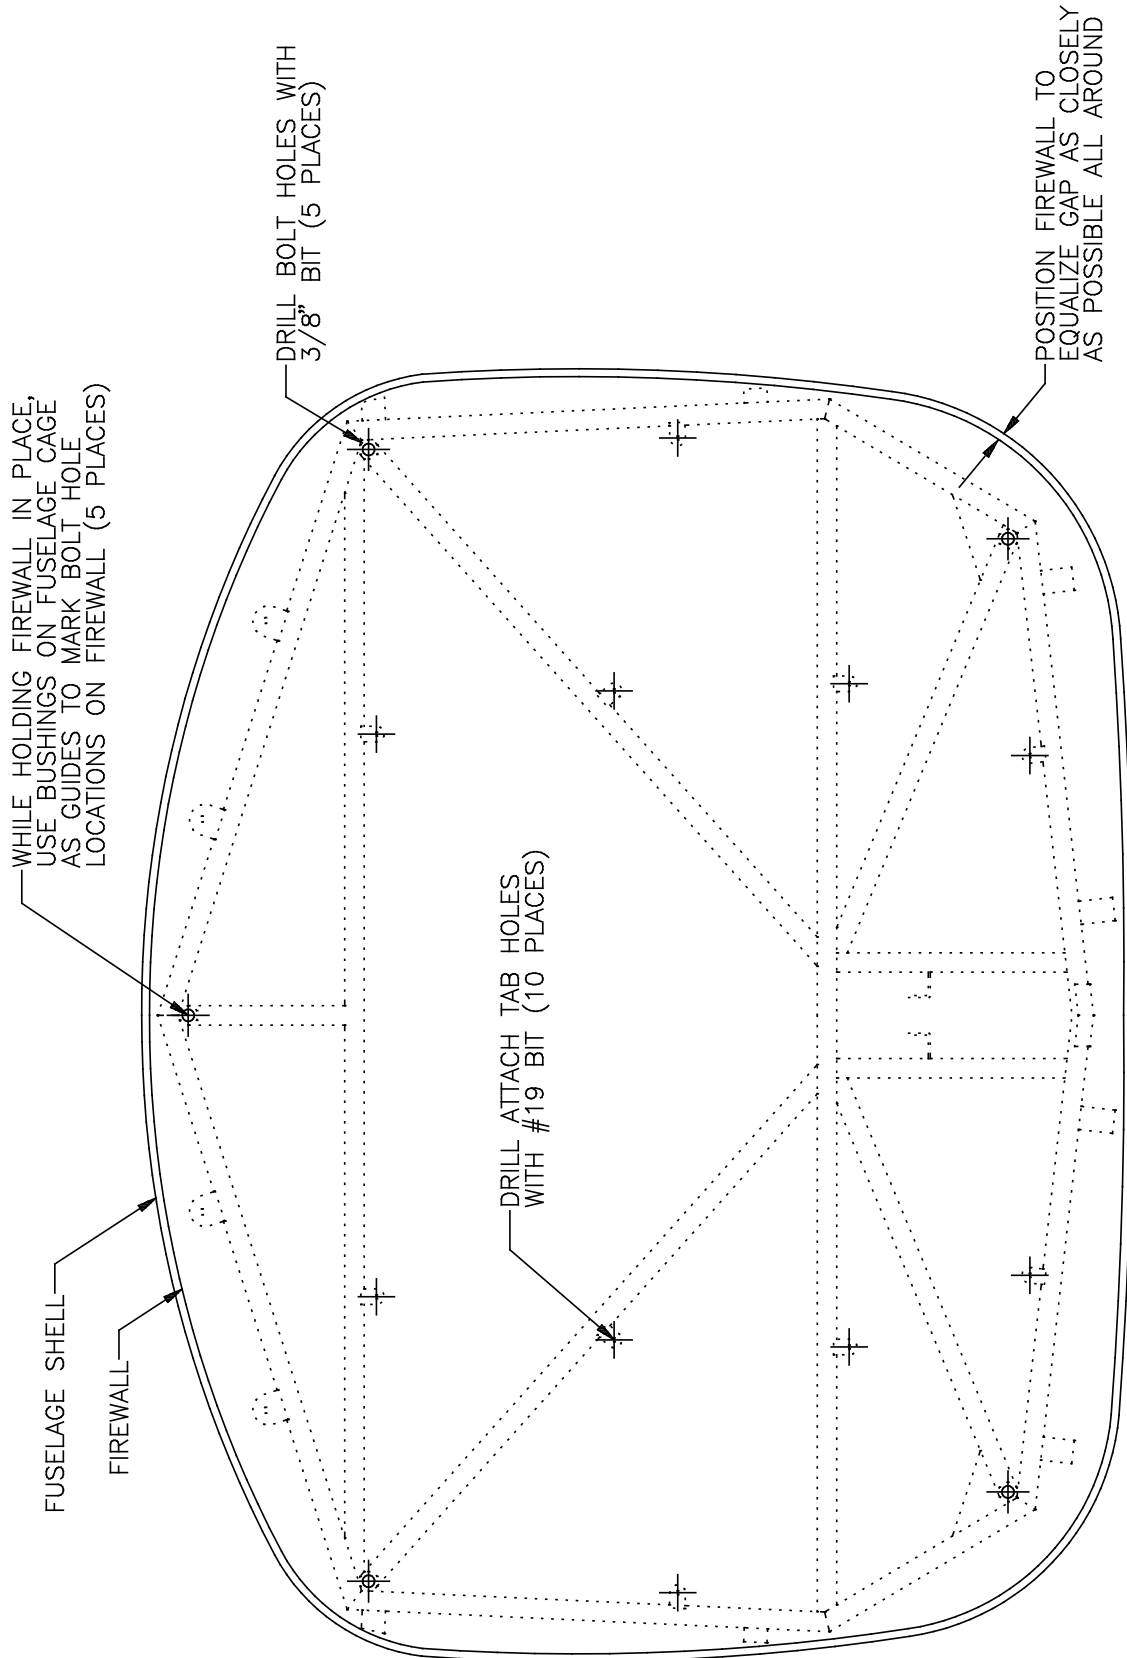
Drilling the Engine Mount Bolt and Attach Tab Holes
